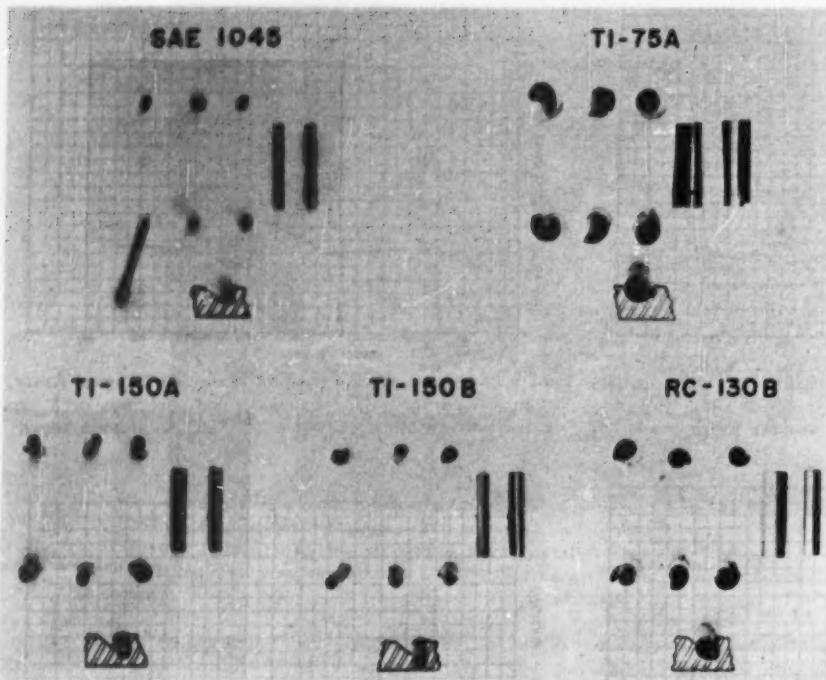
TYPES OF CHIPS FORMED ON VARIOUS MATERIALS, WHEN SURFACE BROACHING WITH STANDARD HSS TOOL OF 5 DEG RAKE AND 5 DEG RELIEF; 0.002 IN. RISE PER TOOTH
